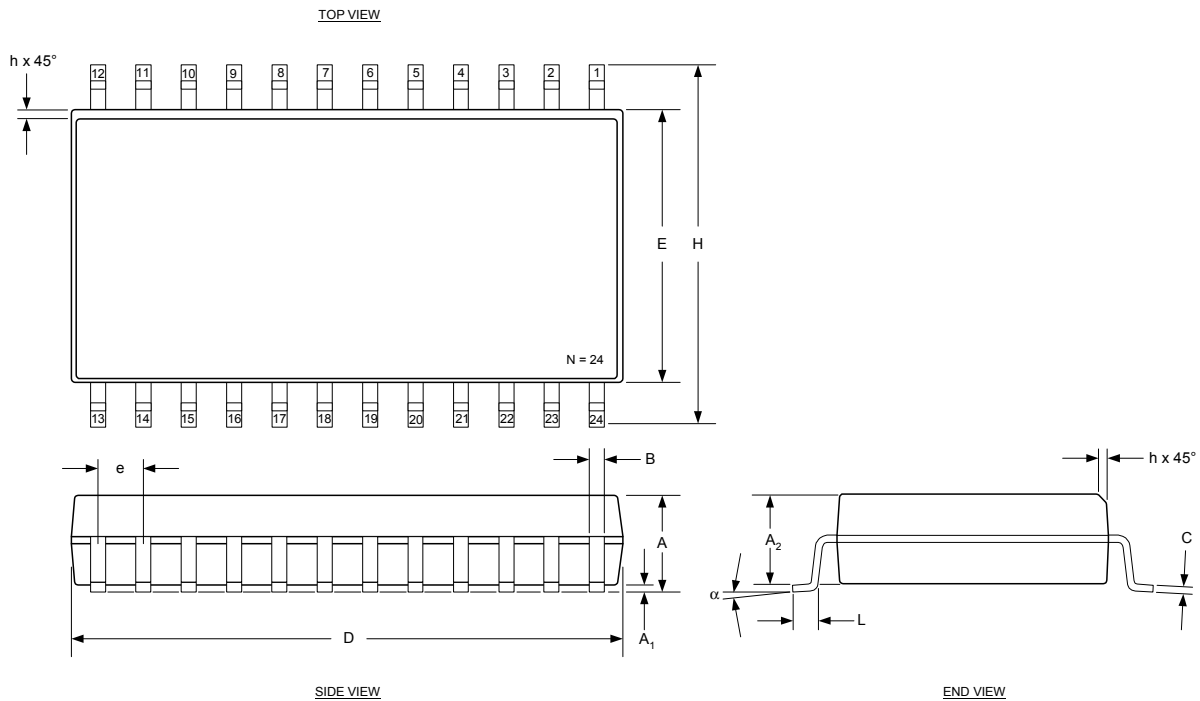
Package Outline Drawing SOP24, 300 MILS
